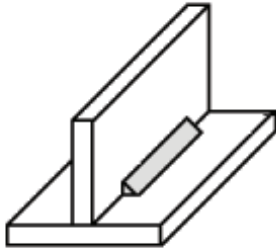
PREVIOUS APPROACH: MEASUREMENTS USING THE DENTAL MOLDING TECHNIQUE ARE TAKEN AT THE CRITICAL WELDS OF THE STRUCTURE.
